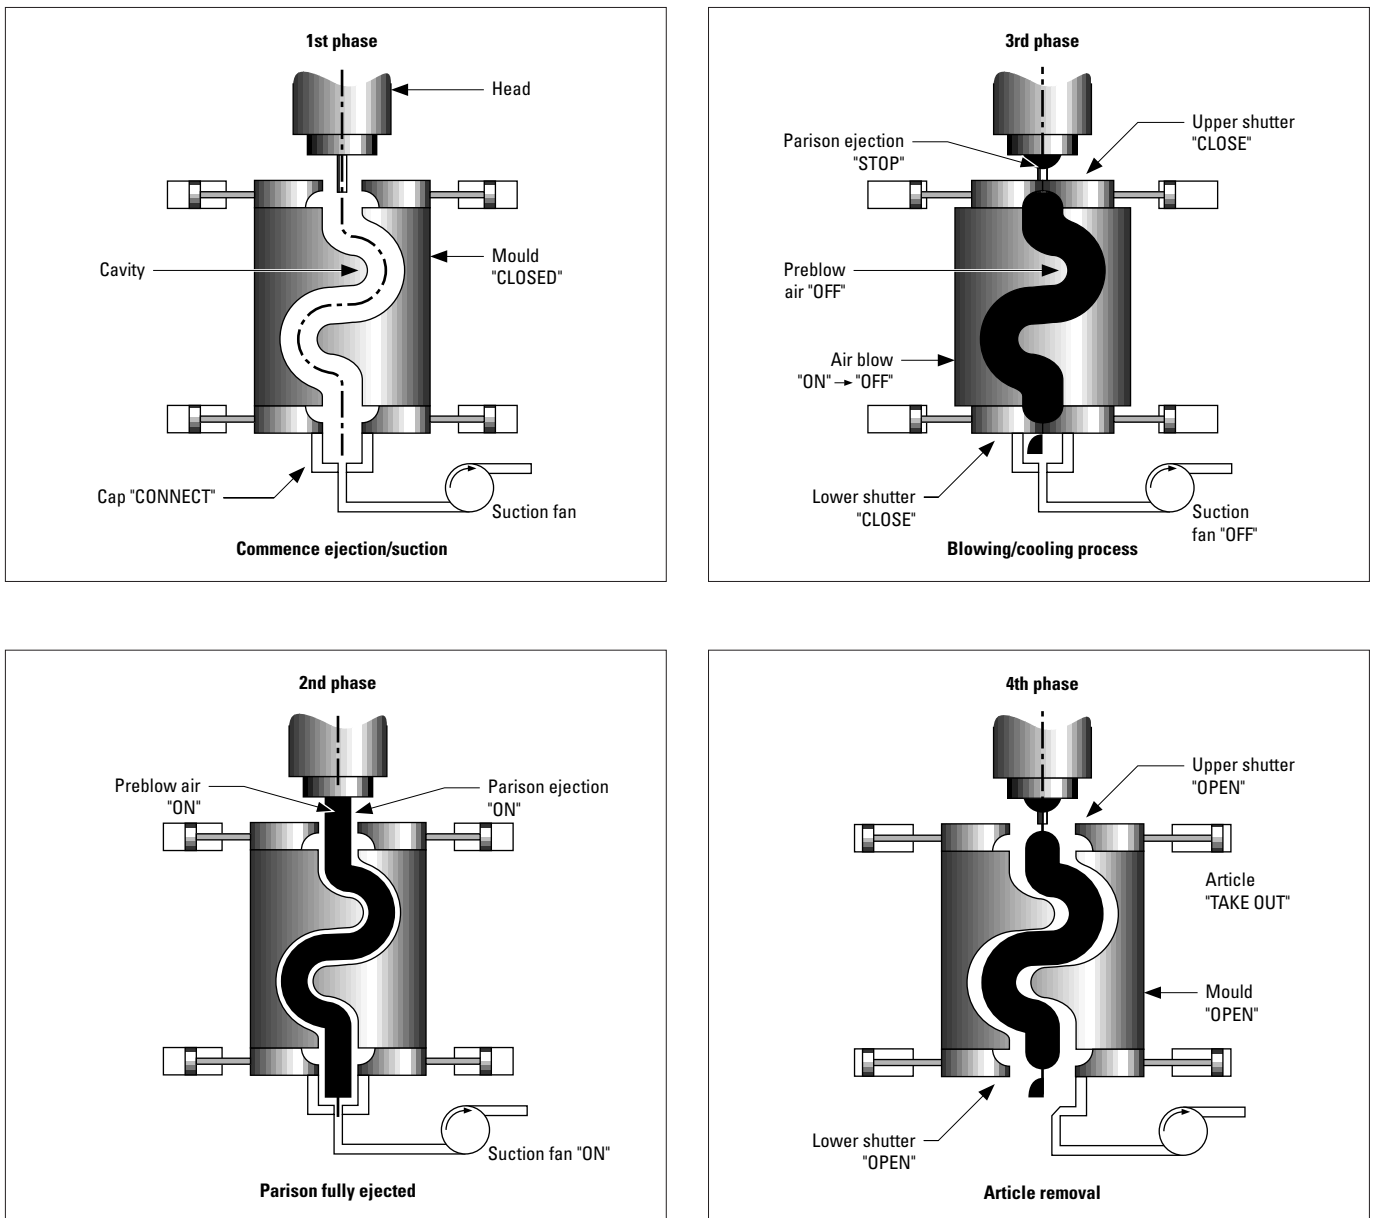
Suction blow moulding process. (Diagram and process description courtesy of Fischer W. Müller Blasformtechnik)
